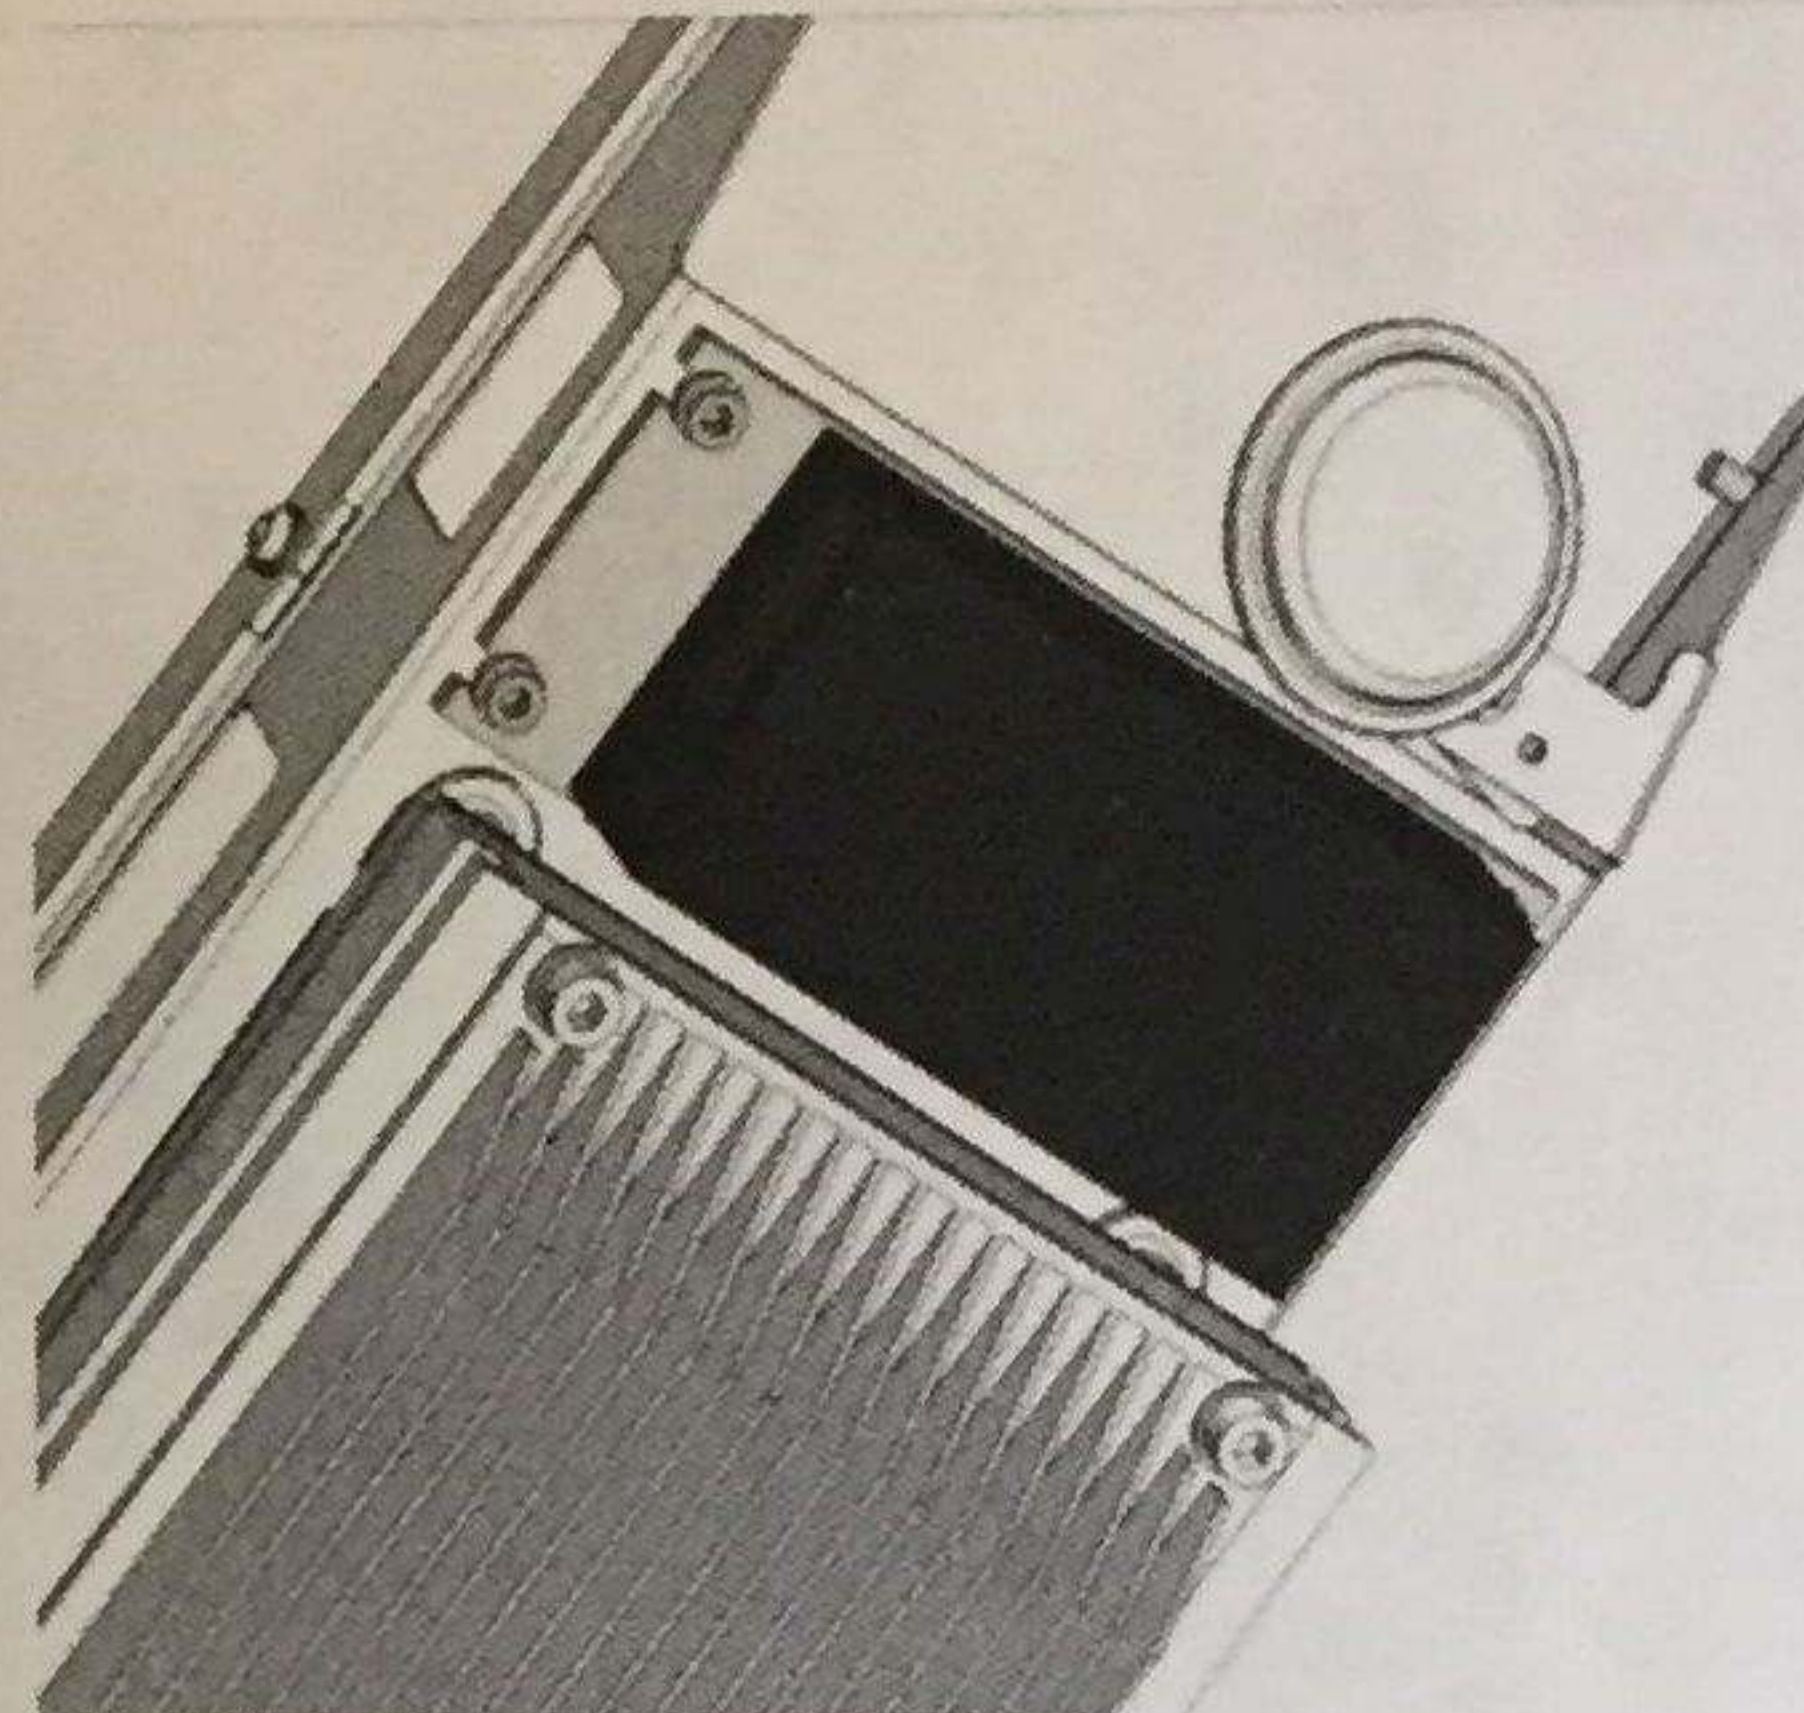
DCDC Converter (shown on the motor controller assembly)
